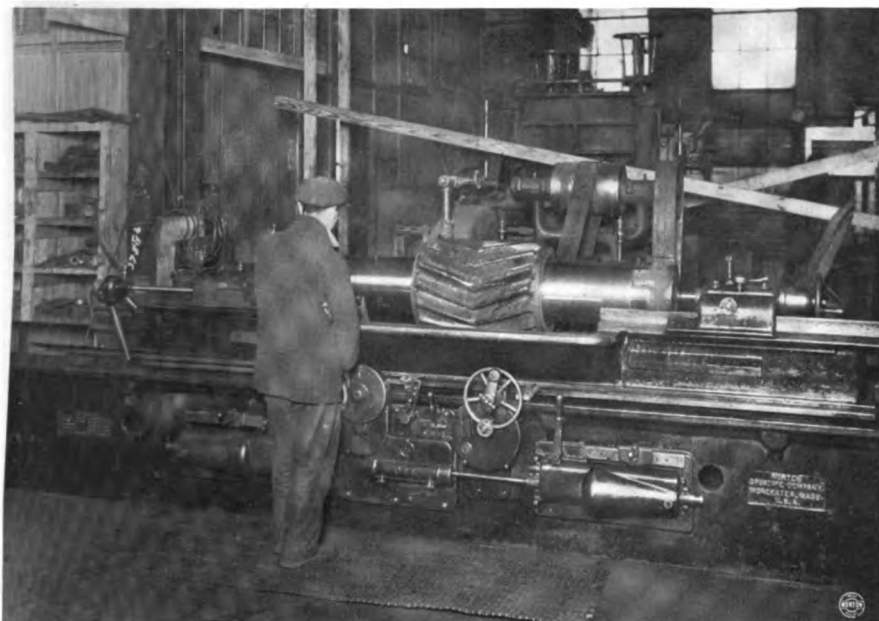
Norton Grinder grinding a 16-inch herring bone mill pinion
